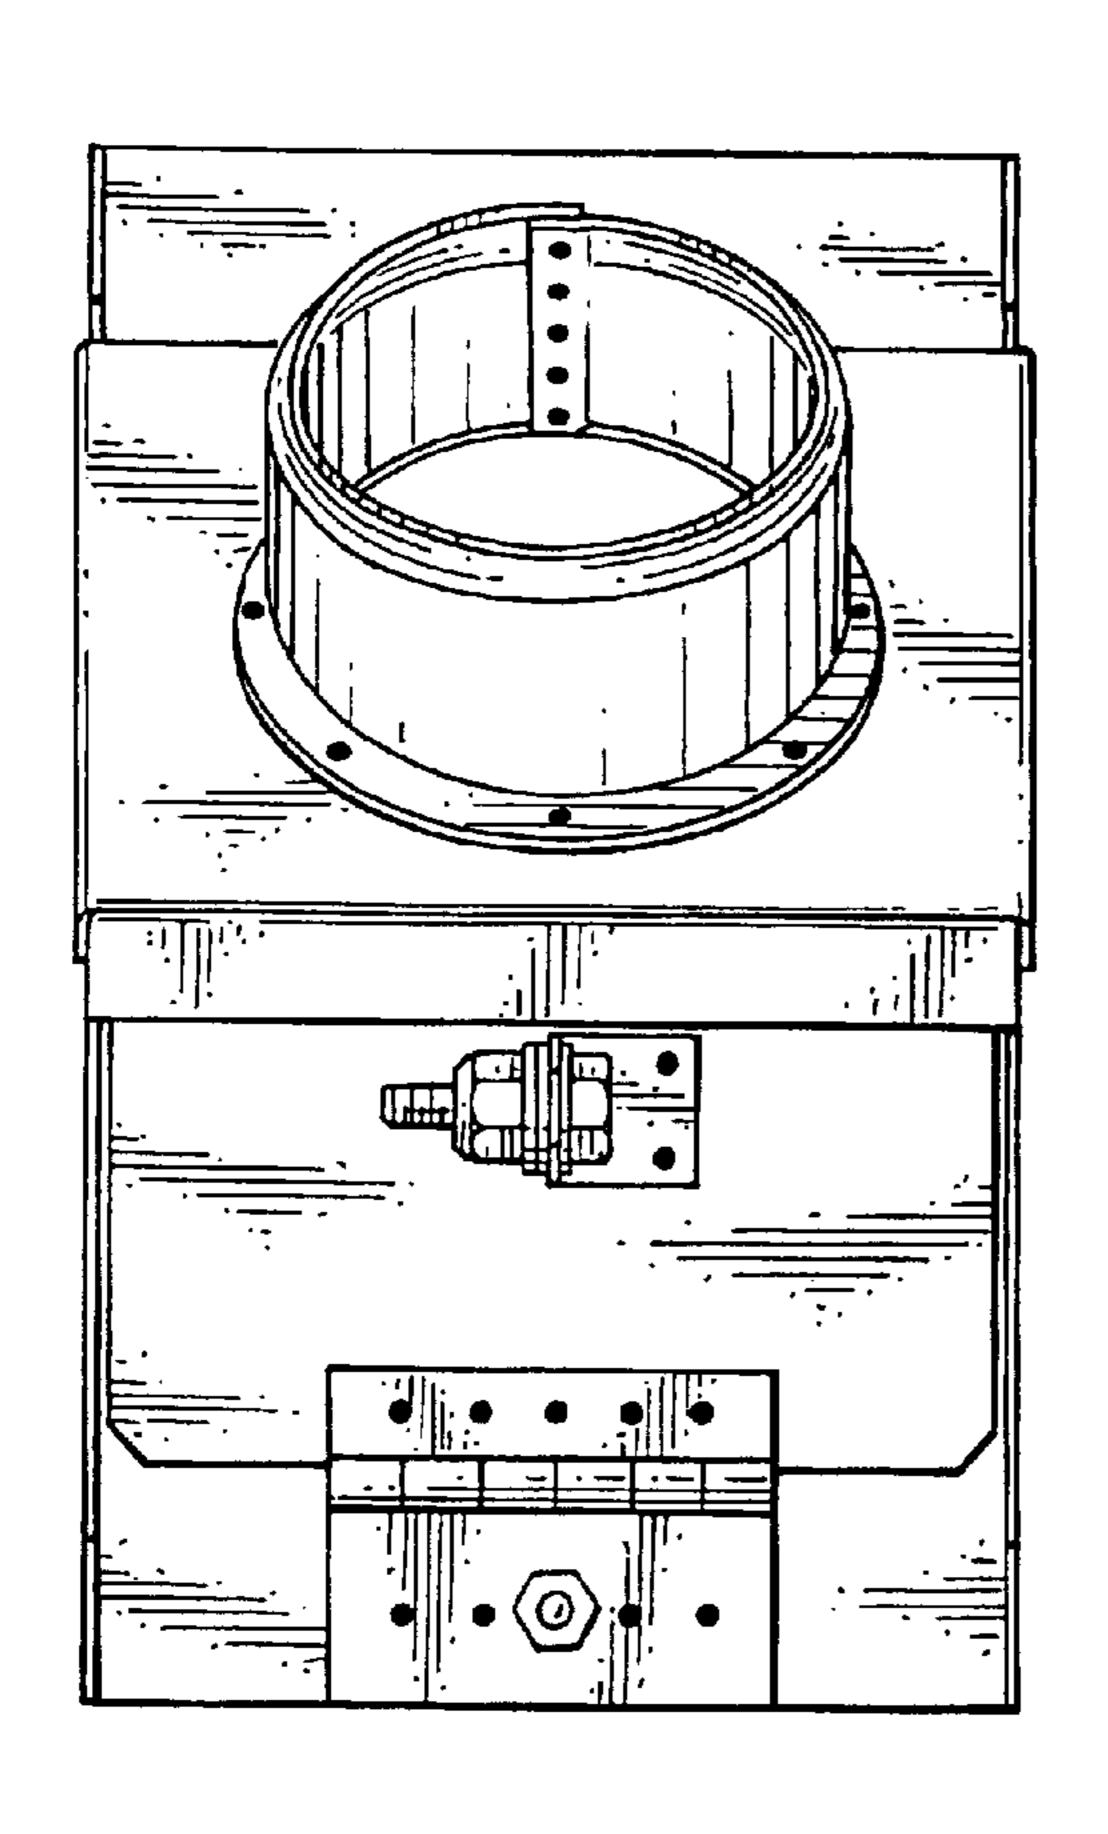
is a left side elevational view of the embodiment of FIG. 1;
